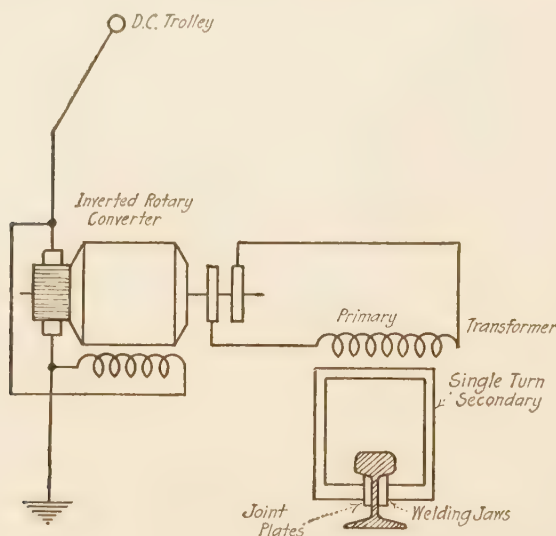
Diagram of connections for electric welding outfit.
